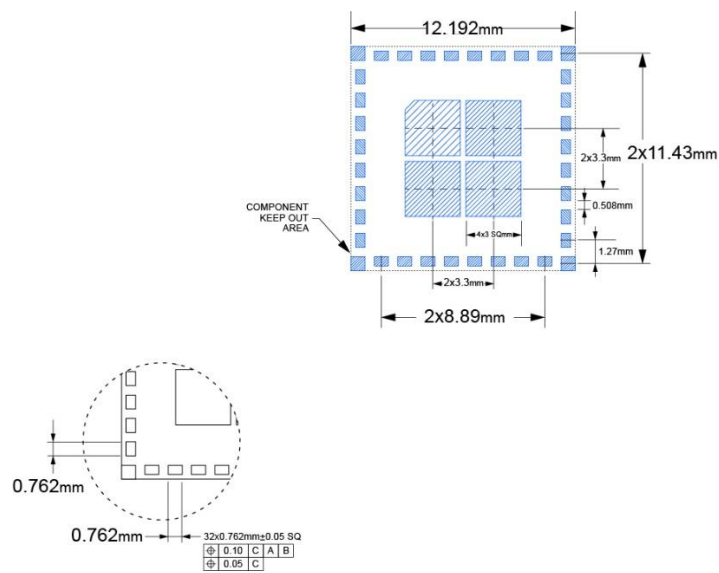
CQM711-0-50-0P Module PCB Landing Pattern
